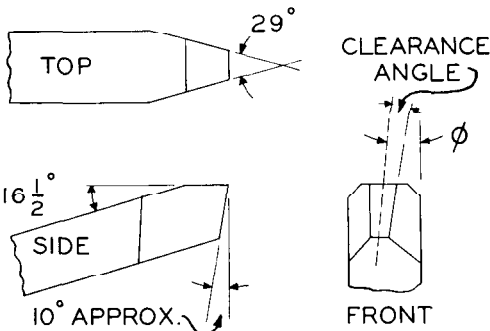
Tool bit formed for cutting an external Acme thread. To determine angle ϕ , refer to Figure 40, page 25.
